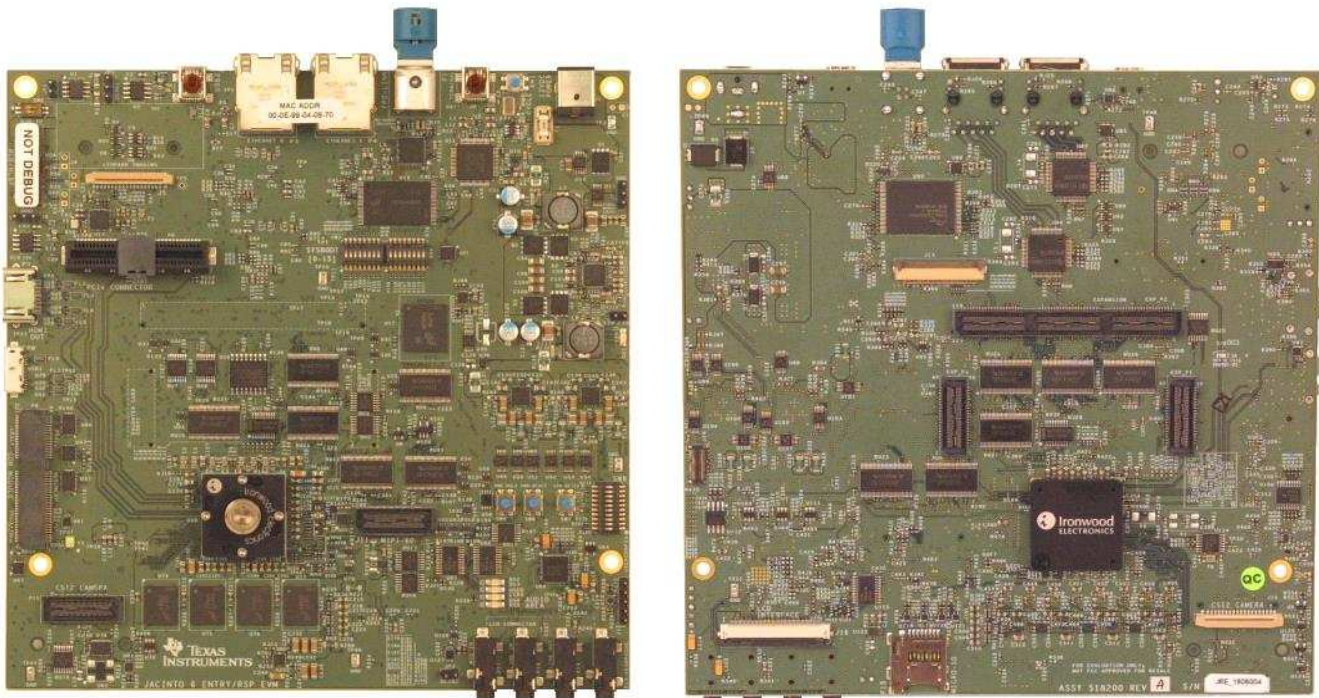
DRA71x, DRA79x, TDA2Ex-17, and AM570x CPU Board (Front and Back Views)
